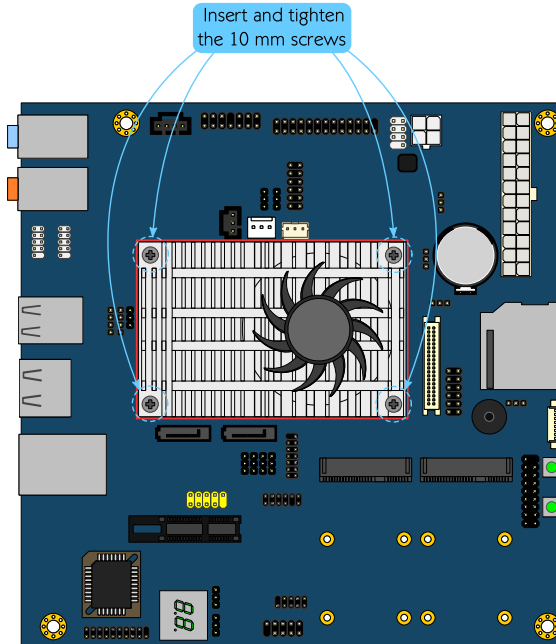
Secure the COMe-8X91 (with heatsink) Module
